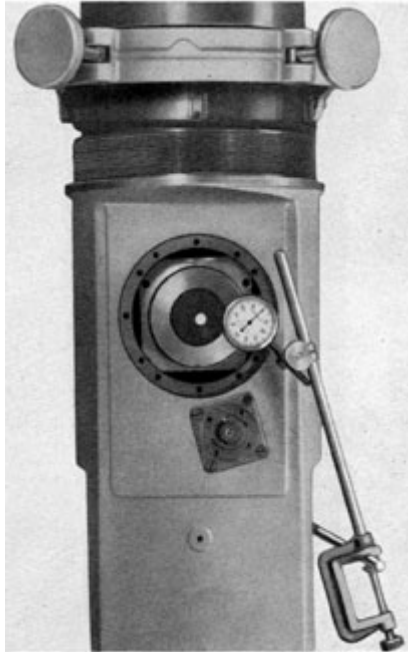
Dial indicator determination of true vertical position on the right side face of the eyepiece alignment jig.
